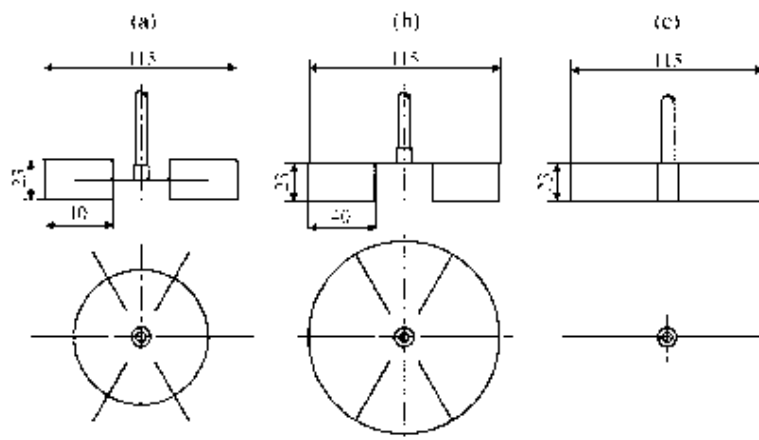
Mechanical foam breakers; a) six bladed turbine b) six bladed vaned disk c) two bladed paddle.
